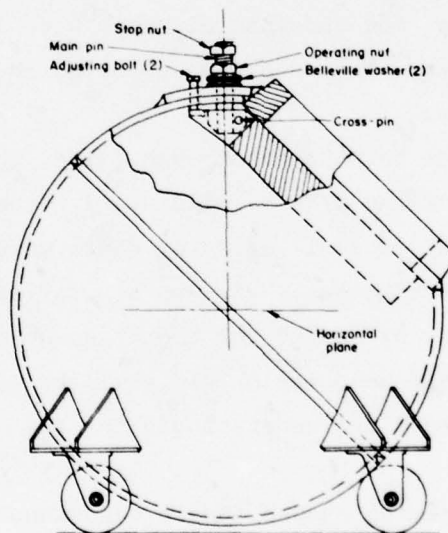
SCHEMATIC SIDE VIEW OF SPHERICAL CONTAINMENT VESSEL WITH SINGLE-PIN DOOR SUPPORT MECHANISM
